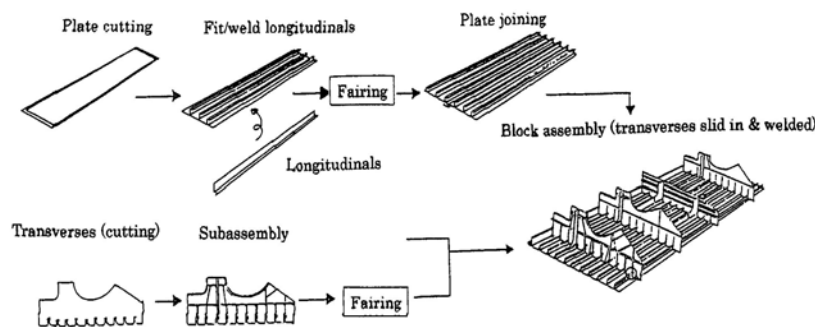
Unit panel and slit construction, flat panel sub-assemblies
